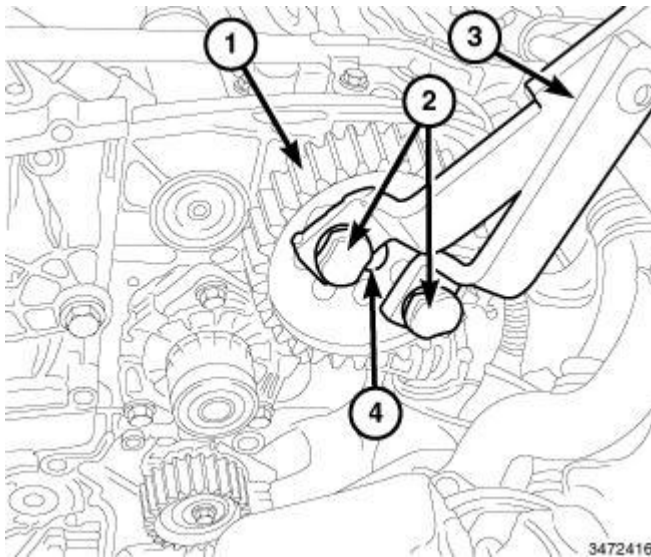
Camshaft Sprocket, Pins, Counter Torque Tool & Bolt
